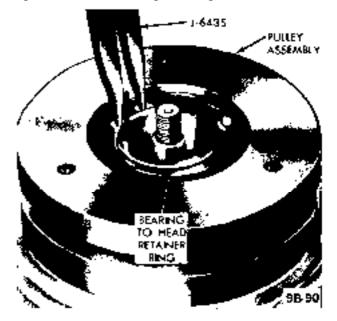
B-116 Removing or Installing Bearing to Head Retainer Ring
